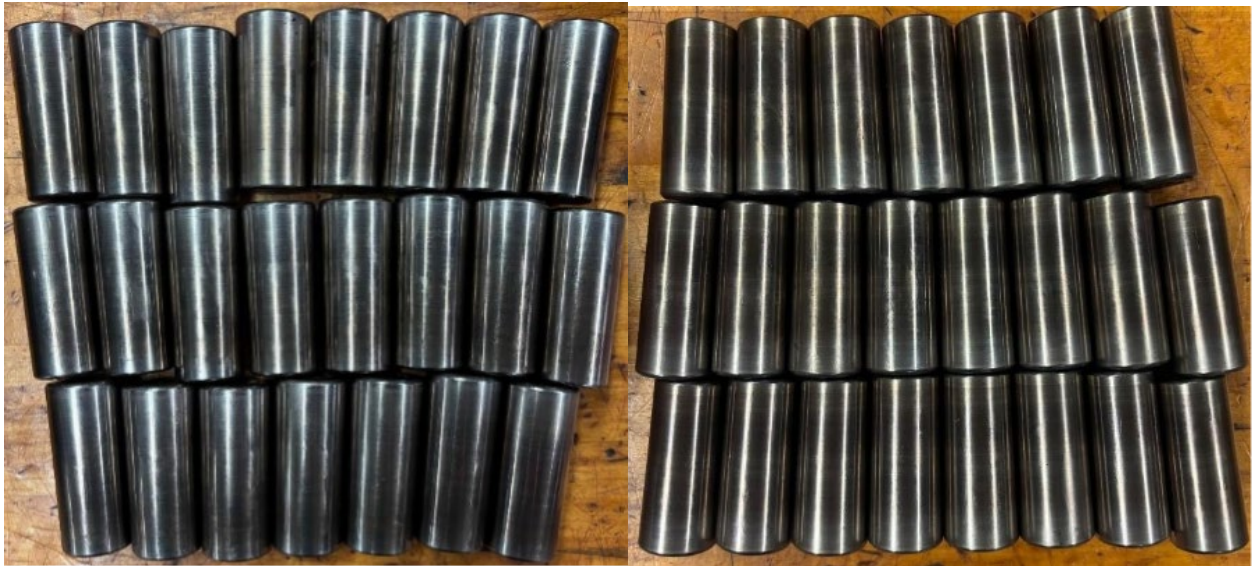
L2 IB cone rollers (left) and OB cone rollers (right)
